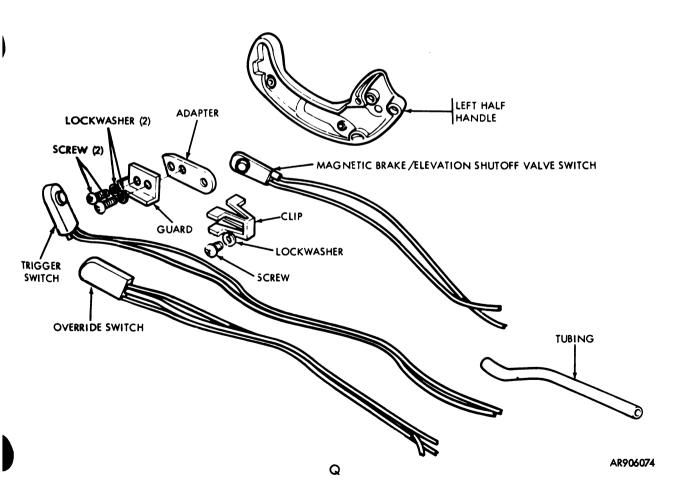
Commander's control disassembly or assembly (4 of 4).
